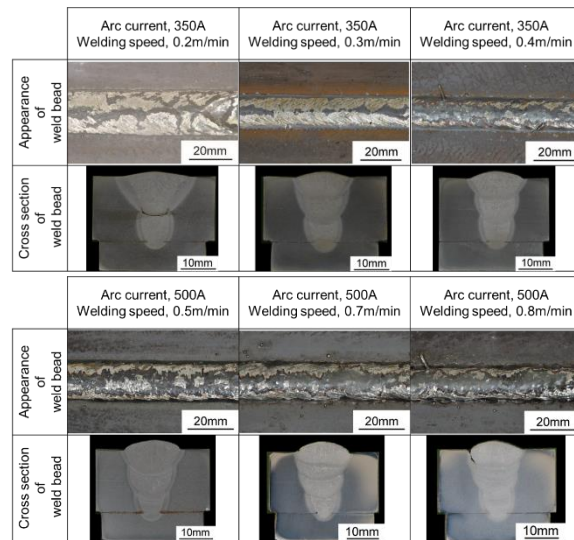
Appearance of weld bead and cross-section [34].
